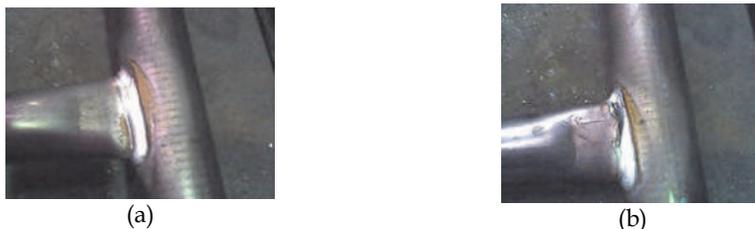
Weld obtained changing welding parameters for small gaps (a) and great gaps (b).
